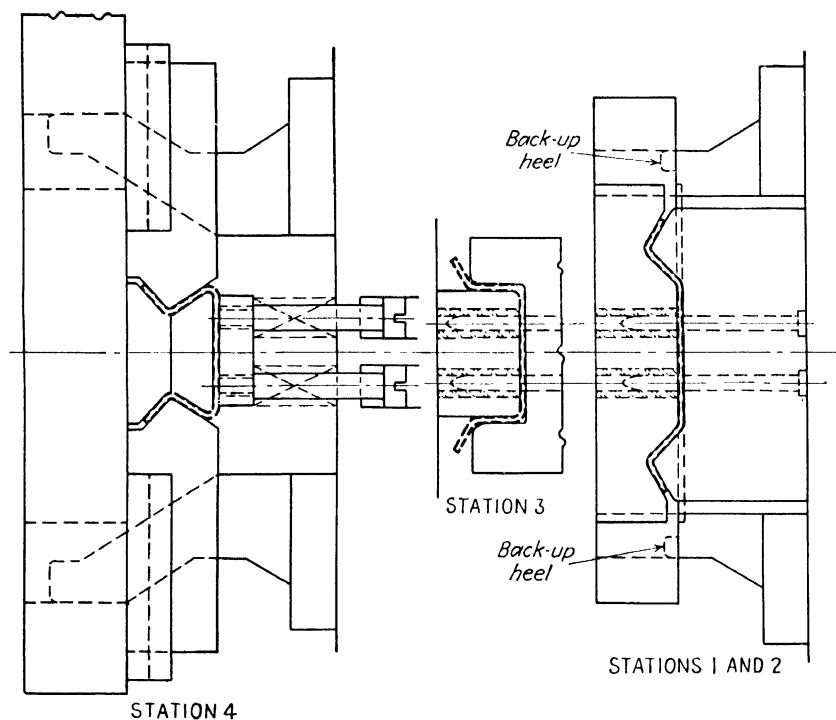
Three views of punches and dies, showing consecutive operations, which are end elevations taken from the left end of the die plan shown in Fig. 78.
